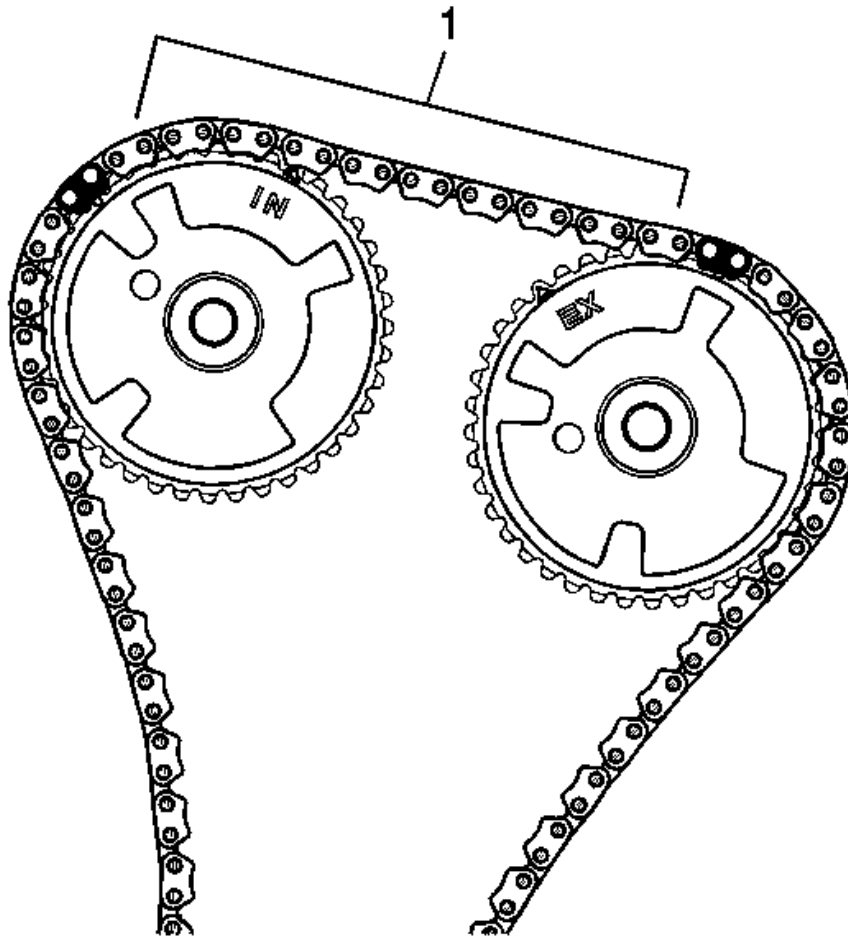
Identifying Secondary Camshaft Drive Chain
